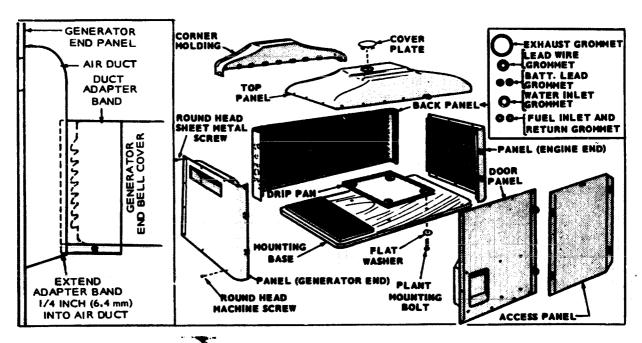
FIGURE A. SOUND SHIELD COMPONENT ARRANGEMENT
